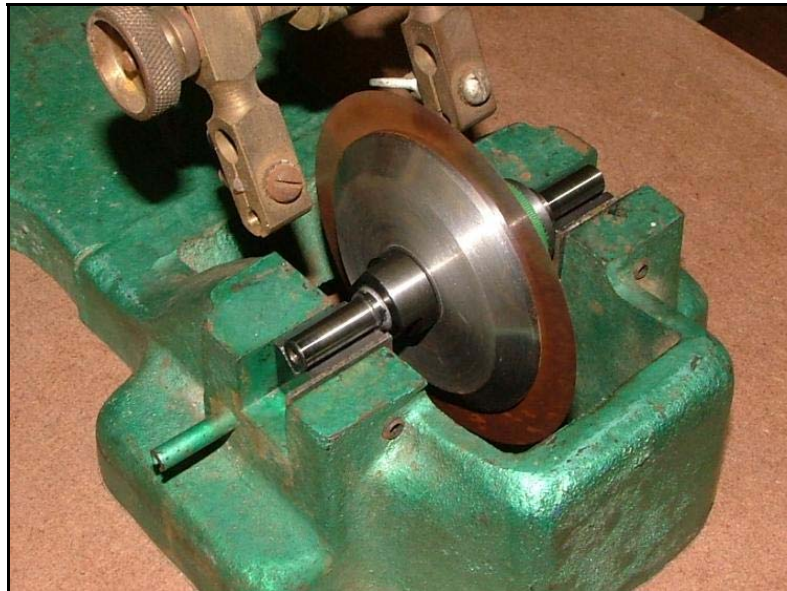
The graphite v-block bearings used in the conventional diamond sawing machine.
